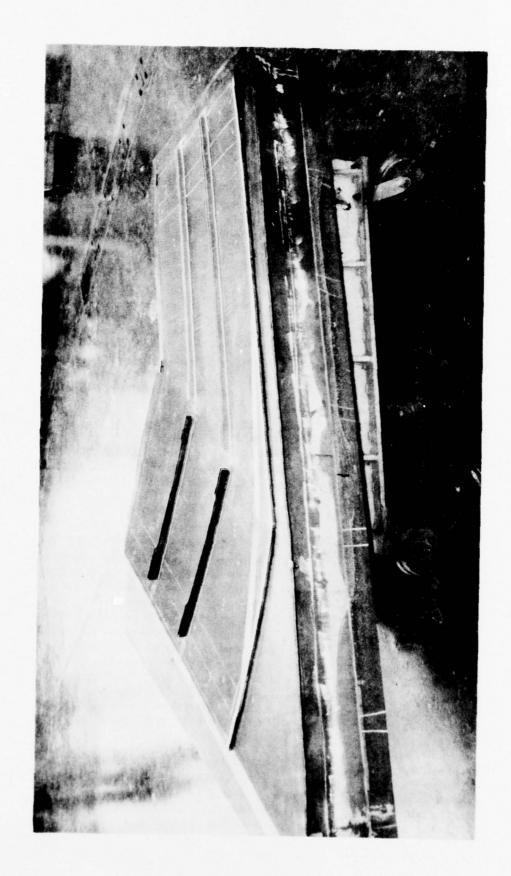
LOWER INTERMEDIATE SPAR CAPS BONDED TO LOWER SKIN PANEL
